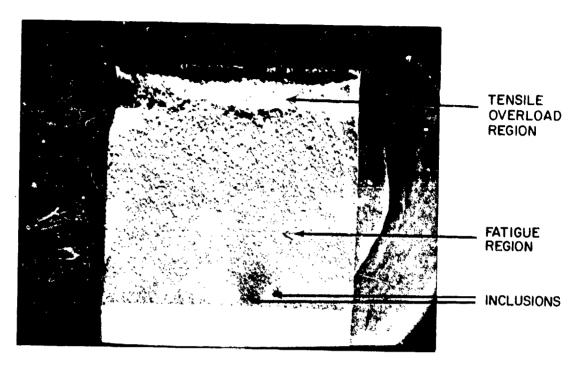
Fatigue fracture surface of A-607 steel, 12x.
